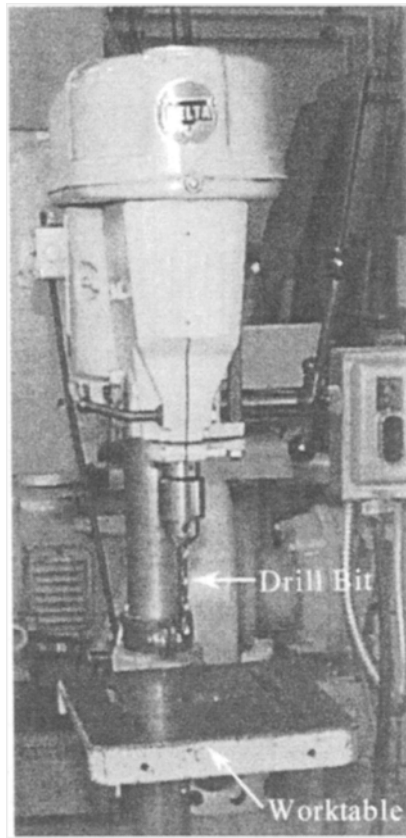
Typical drill press, with drill bit clamped in chuck and workpiece clamped to worktable.
